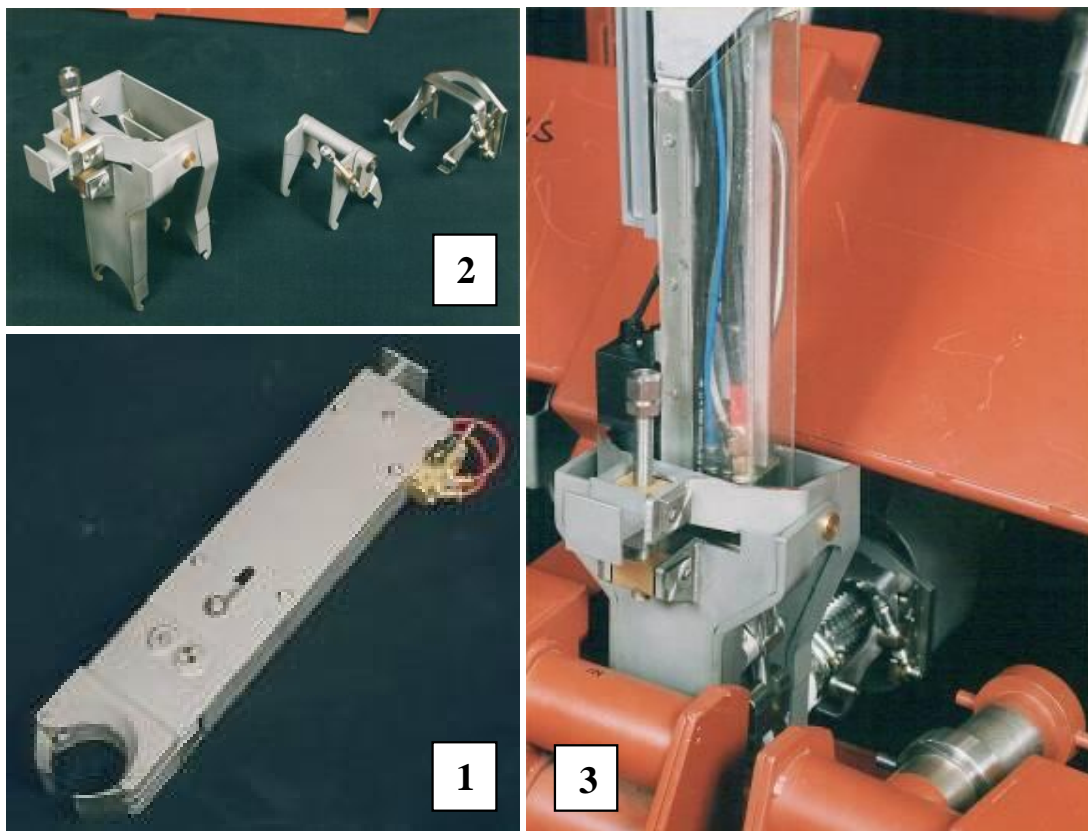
Alignment tools used at JET – 1. Co-axial alignment tool, 2. Clamping tools, 3. Weld tool positioned with joint clamp
